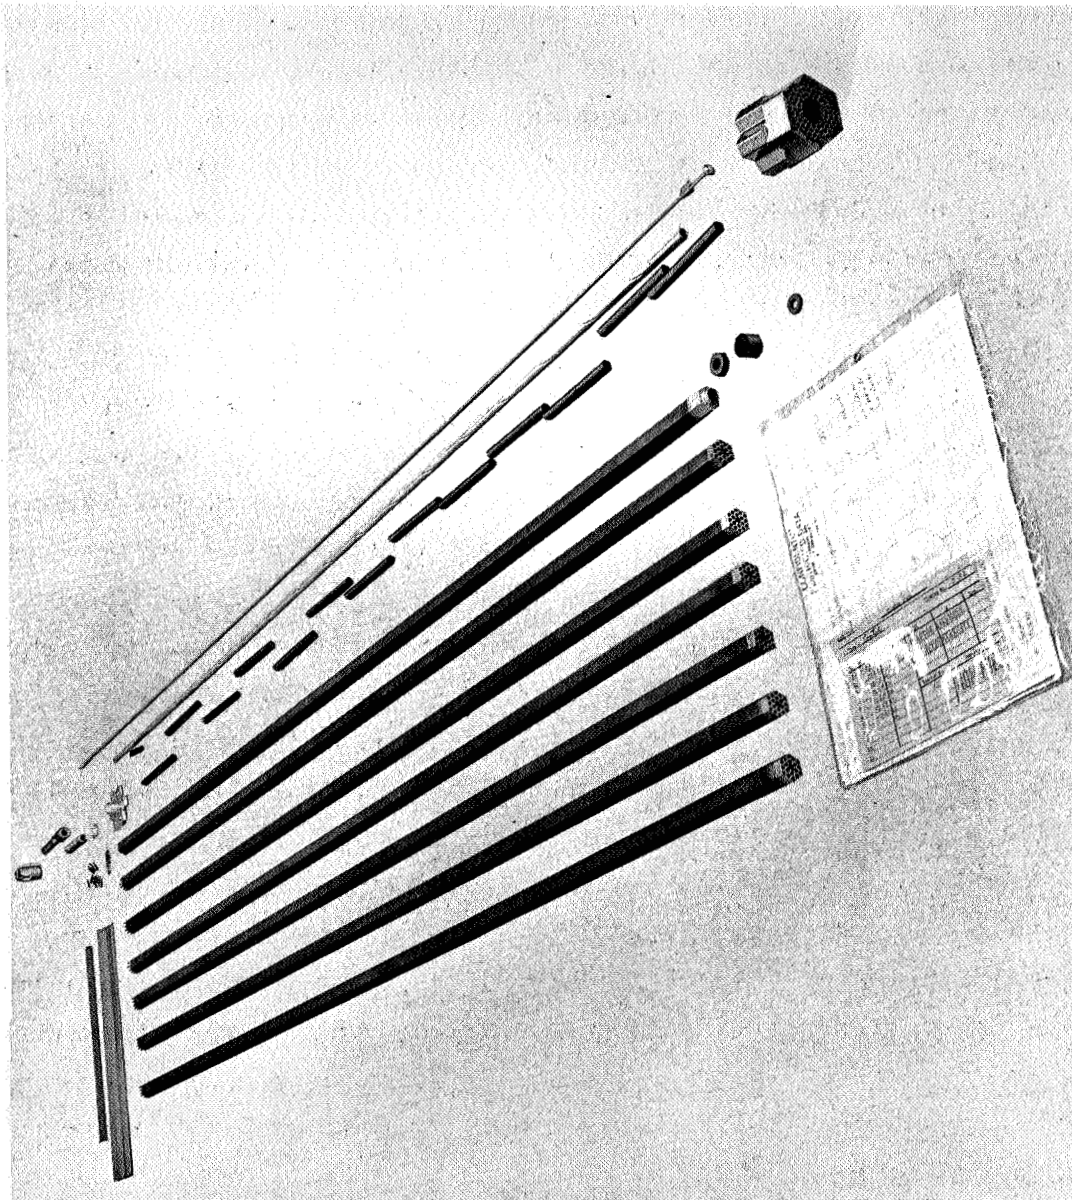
FUEL CLUSTER ASSEMBLY COMPONENTS
